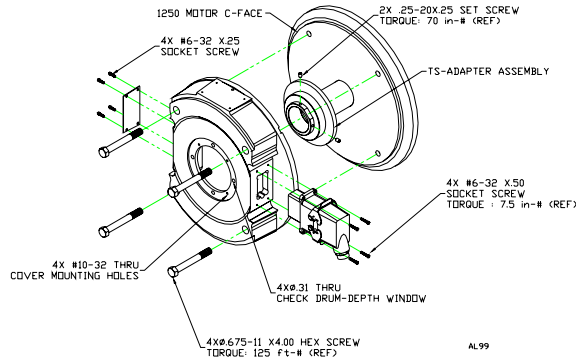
RIM Tach 1250 Small Thru-Shaft Enclosure
